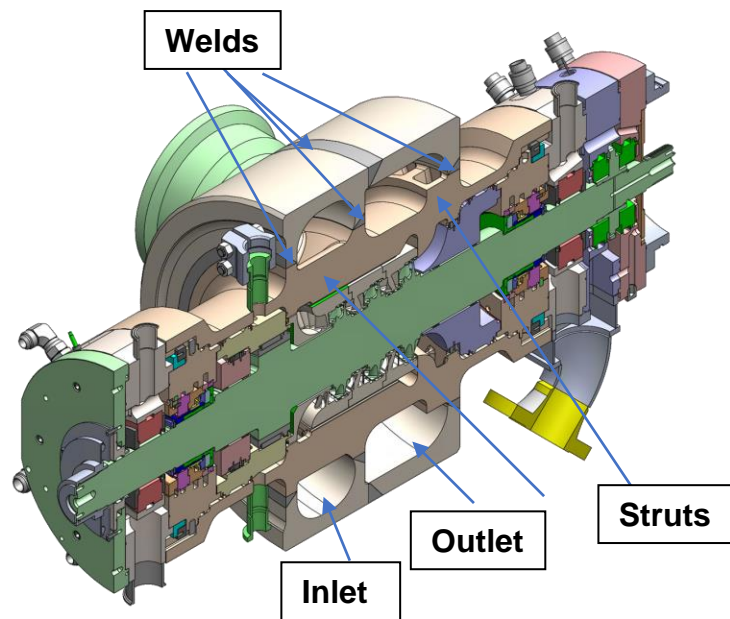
Isometric View of STEP Case Showing Weld Placement
